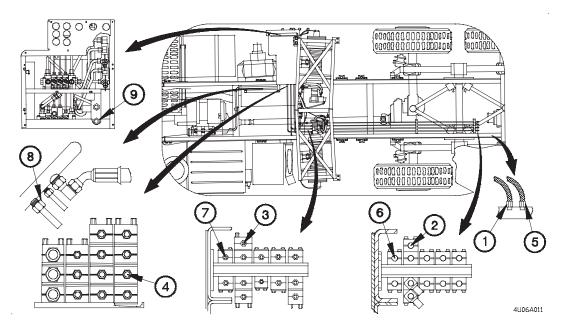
M1089 Wrecker Control Panel External Power Hydraulic Hose and Tubing Locations
